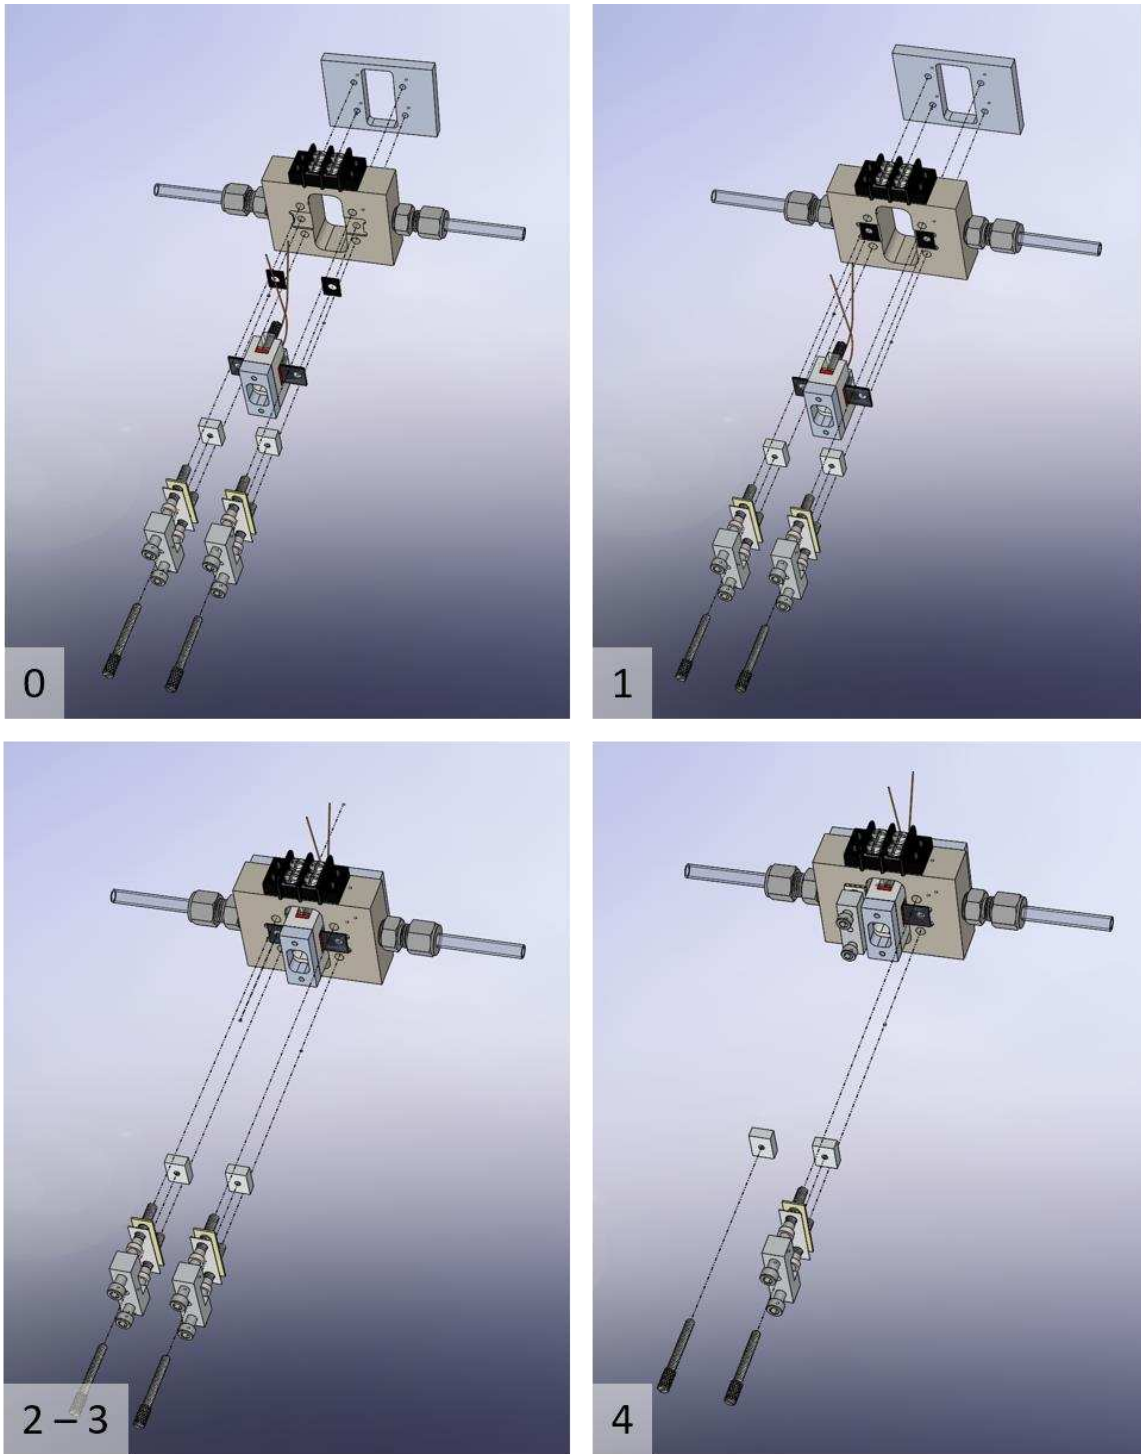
Steps 0 → 4 of the test section installation: (0) exploded view of all parts, (1) Gore-Tex gaskets installed in the recesses of the PEEK manifold, (2 – 3) threaded aluminum plate brought in contact with PEEK manifold and test section wires passed through the opening in both, and (4) hold the test section while installing the 1<sup>st</sup> clamping structure
